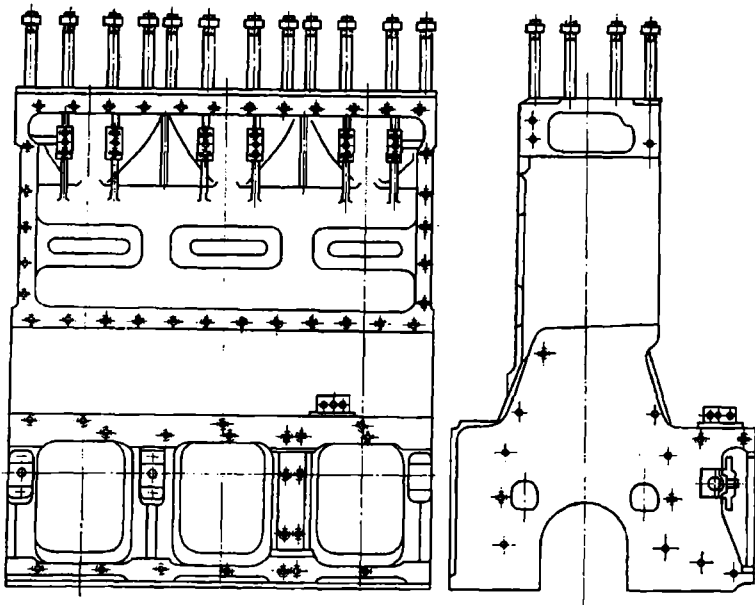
Twin-section cylinder block of two-stroke diesel engine
